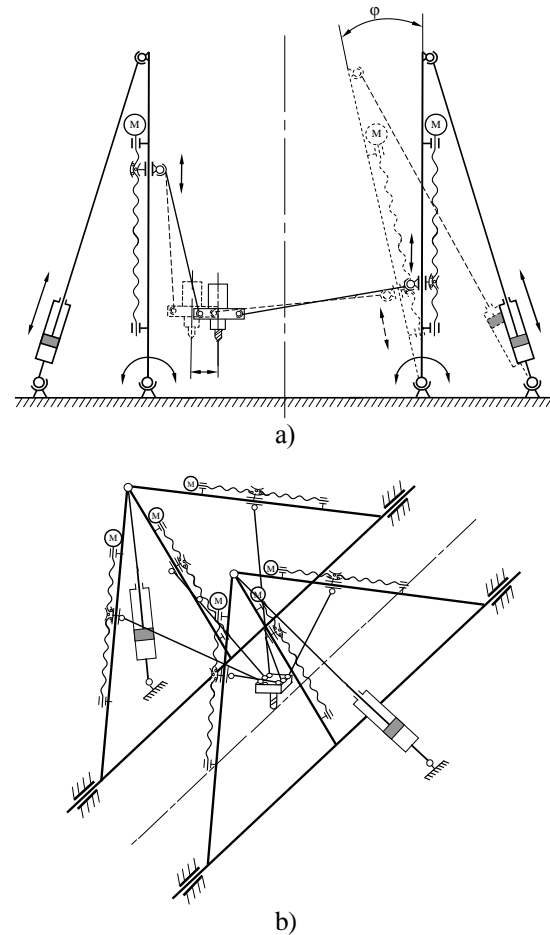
Frame layout of MPS with reconfiguration capacity: a) – structural scheme; b) – kinematic scheme [7]
